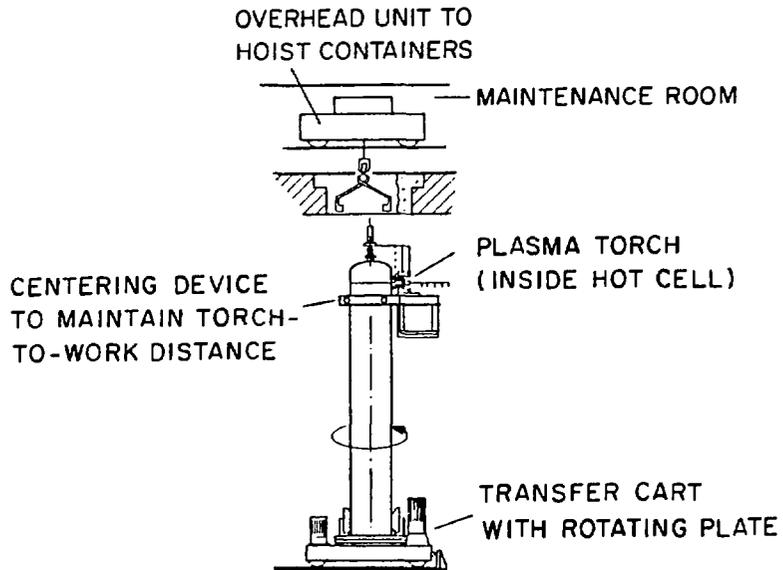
Illustration of Plasma-Arc Welding Machine
